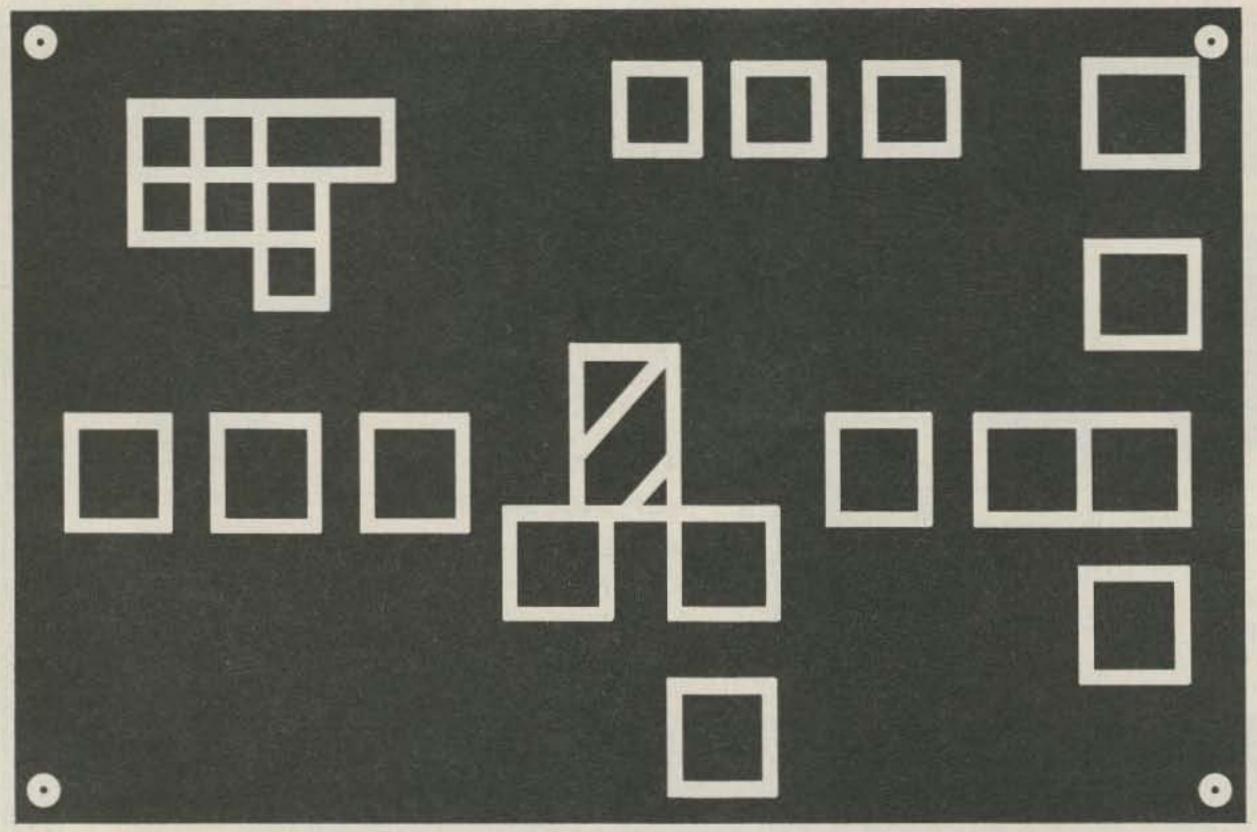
PC board foil pattern. Cut out hole for Q1 in center of board.
